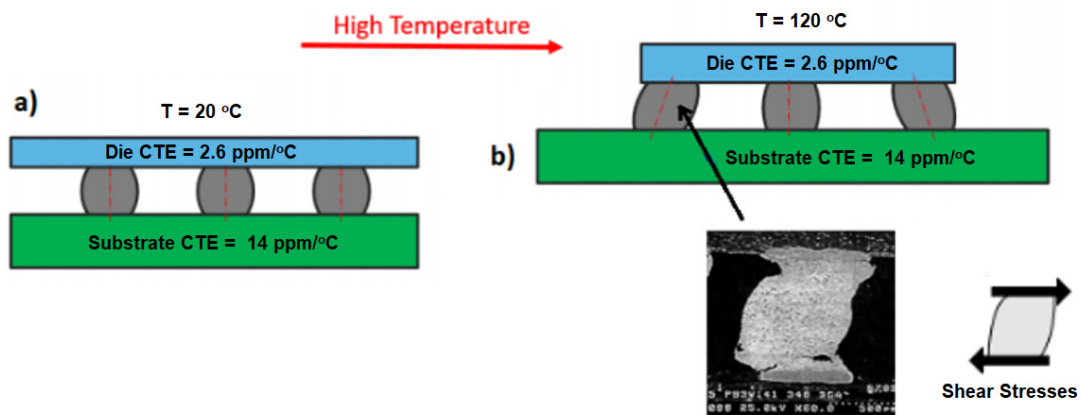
Classical PCB Solder Joint Fatigue [97-99].
